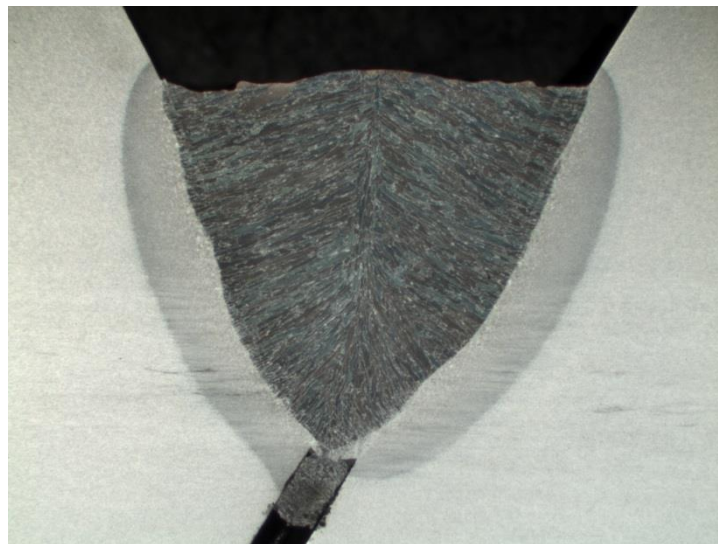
Macro section of 75 mm GMAW/SAW tandem test bead
